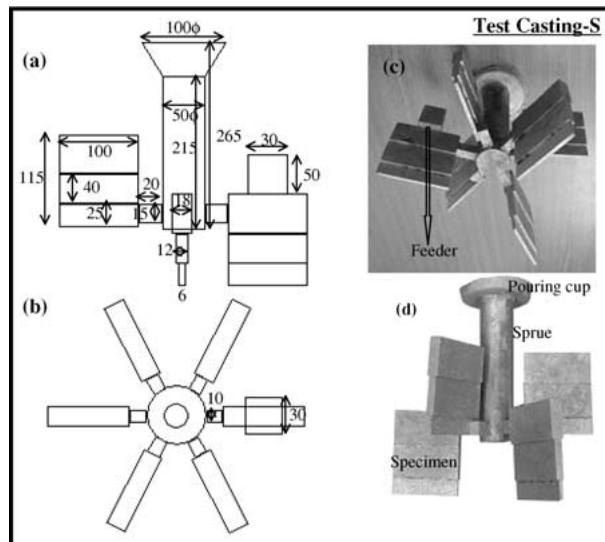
The shape and dimension (unit: mm) of the step test casting-S with 6 stepped plates, 3 of them with top gating and 3 of them with bottom gating; (a) side view, (b) top view; photographs of the casting: (c) view from bottom, (d) view from side.
